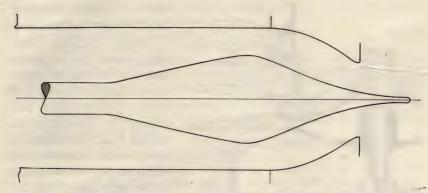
Cross-section of Doble Needle Nozzle (see page 266).\
